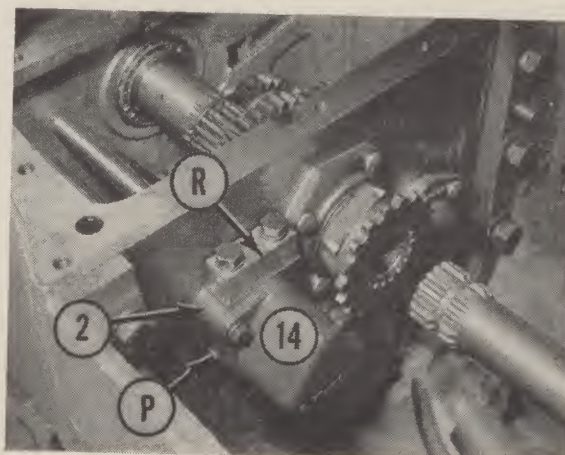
View of gearshift interlock block (2) containing 7 shifter detent and interlock balls. It can be removed without removing transmission top cover. Item (R) is retainer, (14) is cover and (P) is Welch plug.
